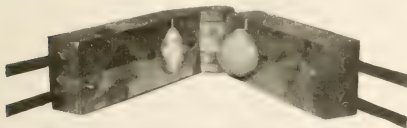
TANK BULB HINGED SHAPING MOLD OPEN.
